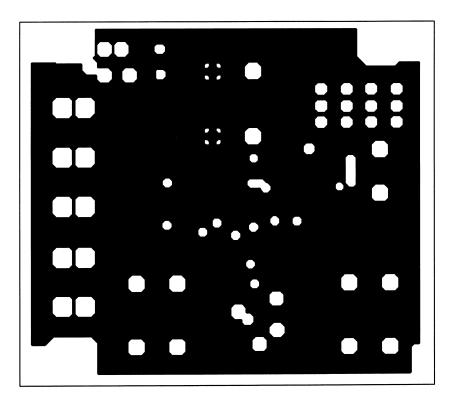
Recommended LQ PC Board Layout: Lower Inner-Layer Layout
